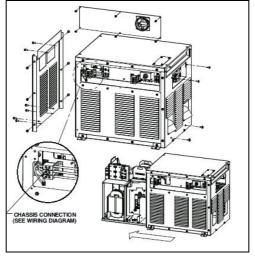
(a) Cleaning inside the welding power supply (ROBOWELD iC/H)
